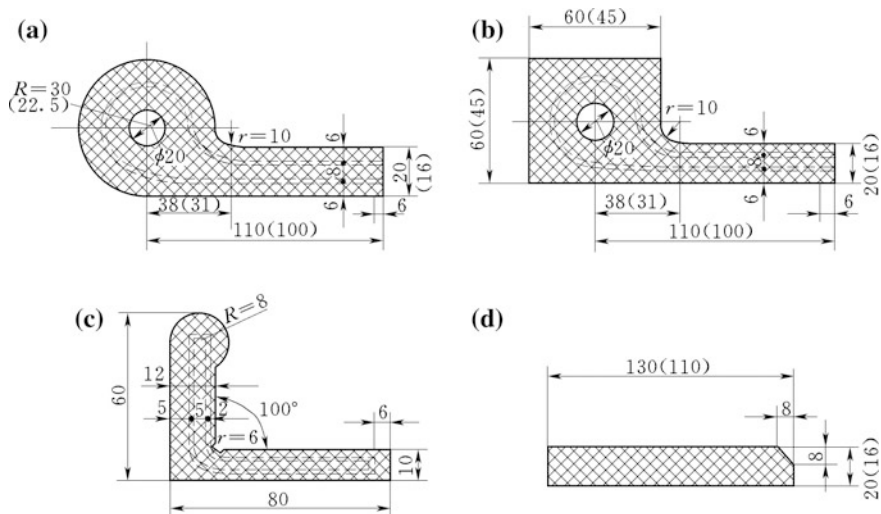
Rubber seals (unit: mm). a J-type (or P-type) seal with circular bulb; b J-type (or P-type) seal with square bulb; c L-type (or angle-shaped type) seal; d rectangular seal
